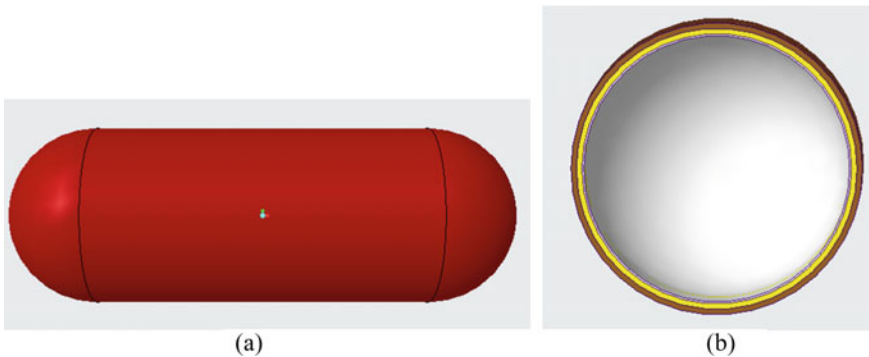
a Transverse placement of the complete assembly of the tank, b sectional CAD design representing gray inner liner, yellow glass fiber layer, and an external red SiC layer
